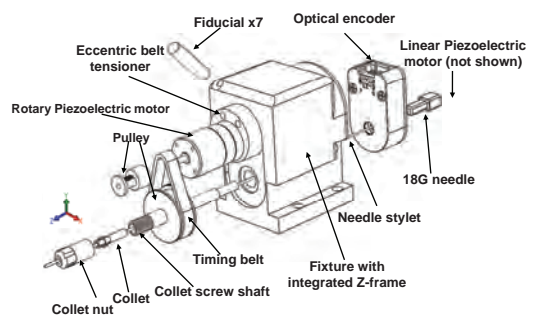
A exploded view of the needle clamping mechanism, fiducial tracking frame and rotary motor fixture with timing belt tensioner.
